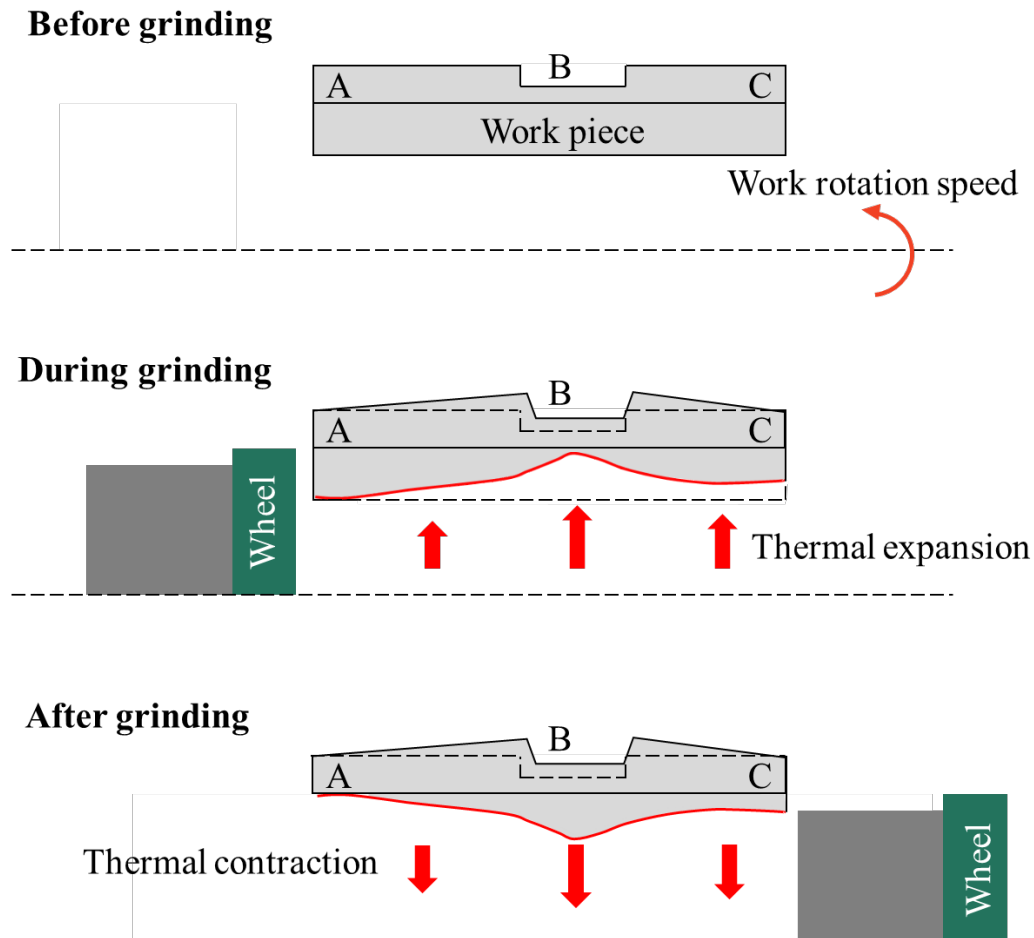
Cylindrical inner surface shape of before and during and after grinding
